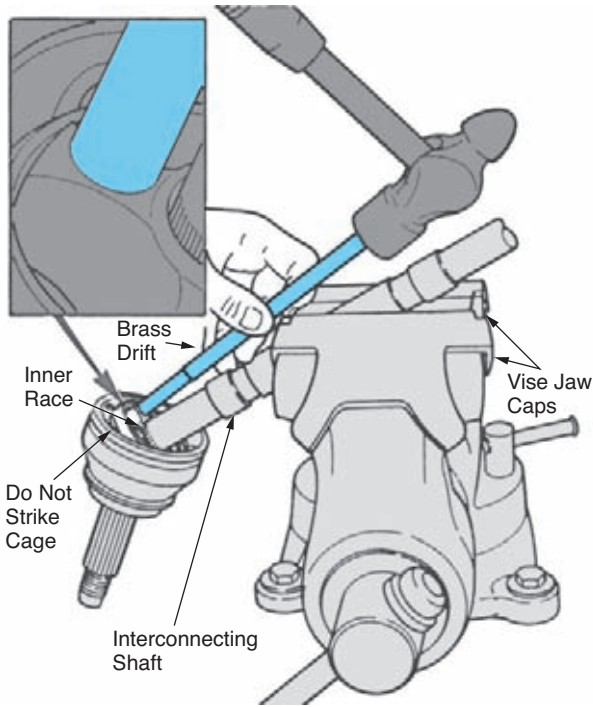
Most outboard CV joints can be removed from the shaft with a sharp tap from a brass drift punch. Be ready to catch the joint when it comes loose. (Courtesy of Ford Motor Company)
